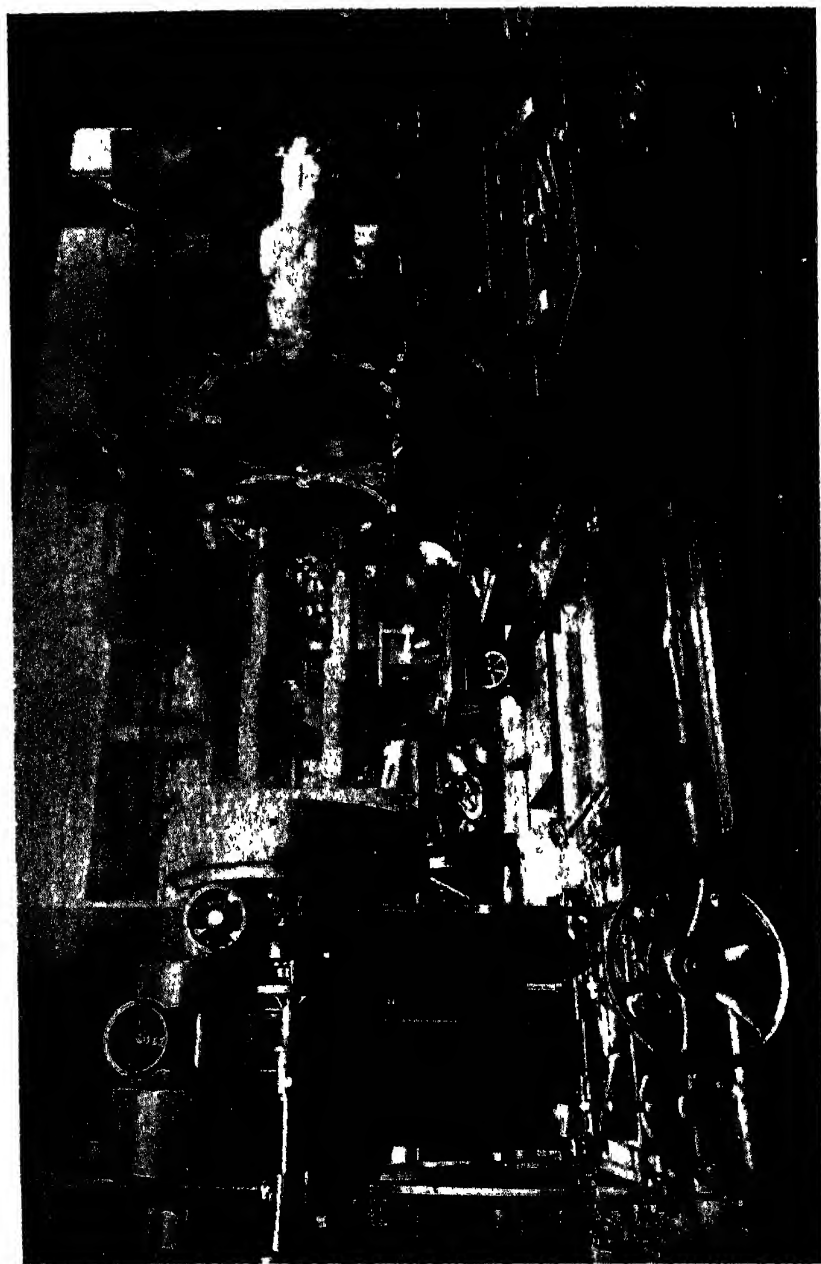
BORING A LOCOMOTIVE CYLINDER ON THE PEARN-RICHARDS MACHINE
